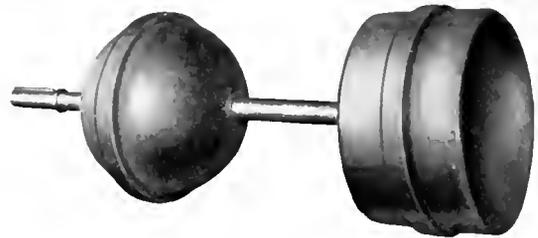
Hermetically Sealed "Dumb-bell" Constituting the Complete Rotating Element of the Refrigerating Machine Shown in Fig. 12
